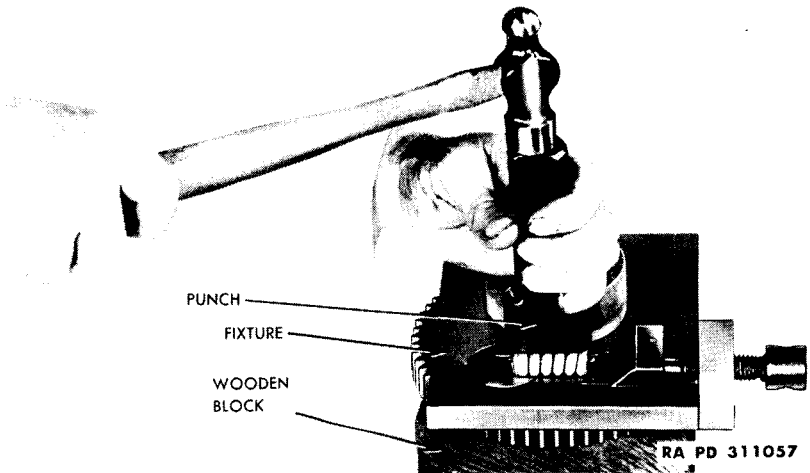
Installing Spring and Retainer Pins, Using Fixture 5A2315
